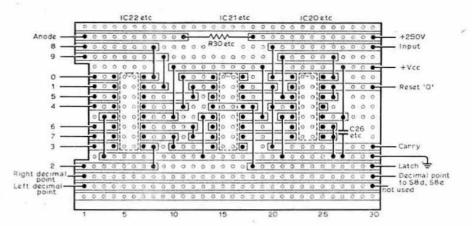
The display panel for cold cathode indicating tubes. Five of these are required
